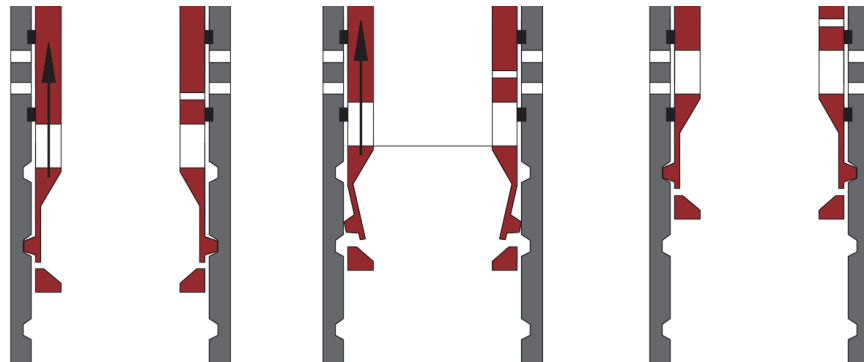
DETAILS OF THE LOCKING MECHANISM OF THE SLEEVE
